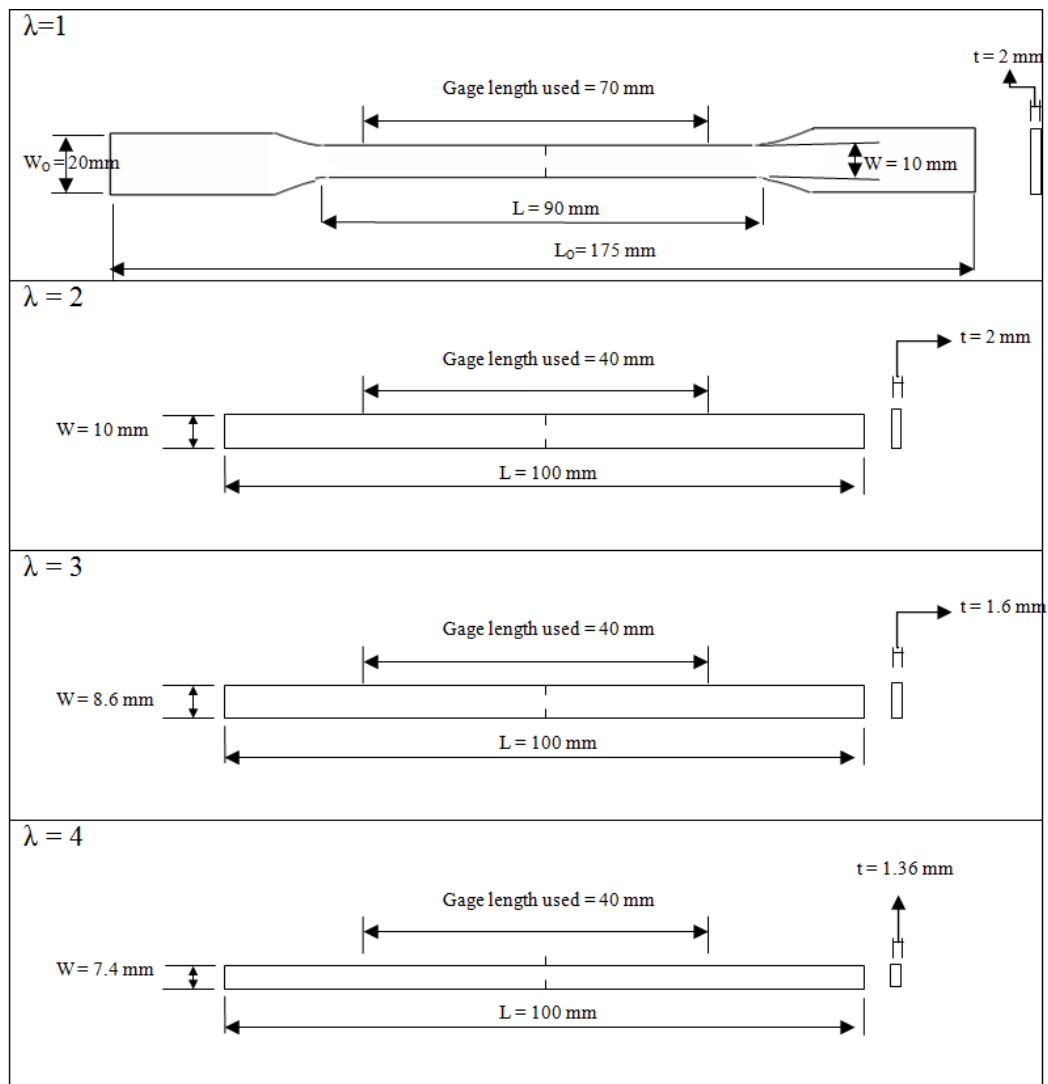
Dimensions of undrawn and drawn samples prepared for tensile fracture test
